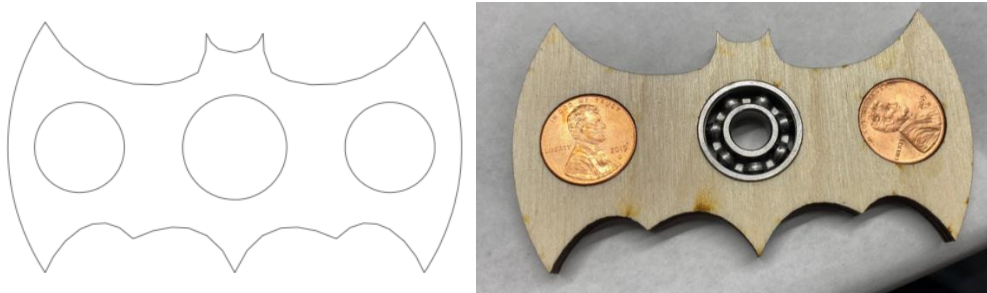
Left: A 2D SolidWorks drawing of a spinner outline to be used for laser cutting. Right: Assembled result of the laser cutting process.
